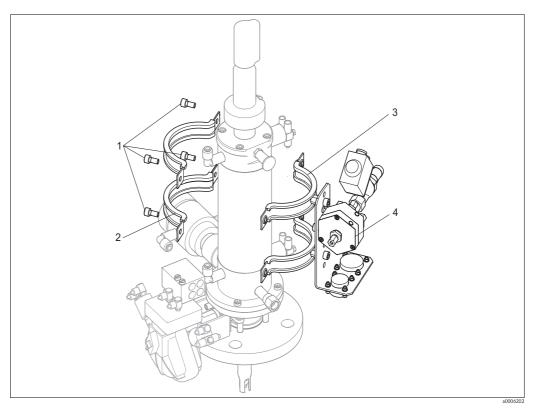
Mounting the rinsing block on the assembly (example CPA473)
